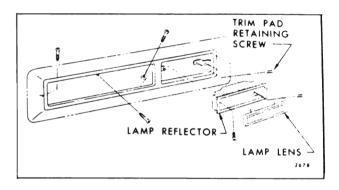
Door Trim Courtesy Lamp - Cadillac "E" Body
